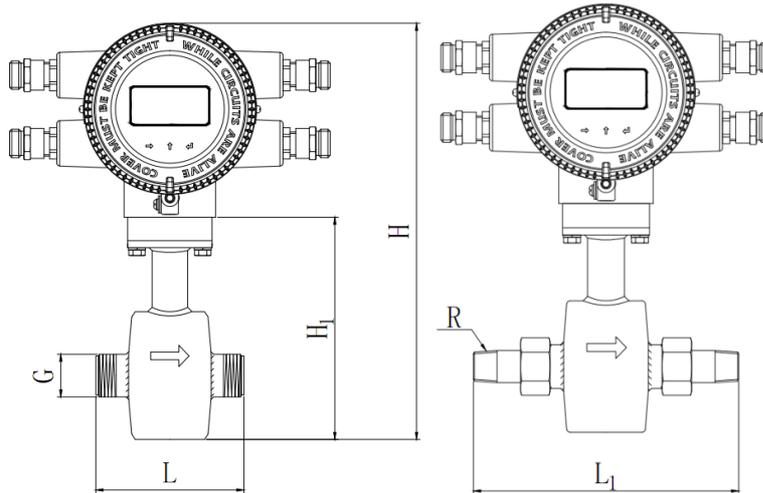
3 Schematic diagram of external dimensions of threaded calorimeter41
